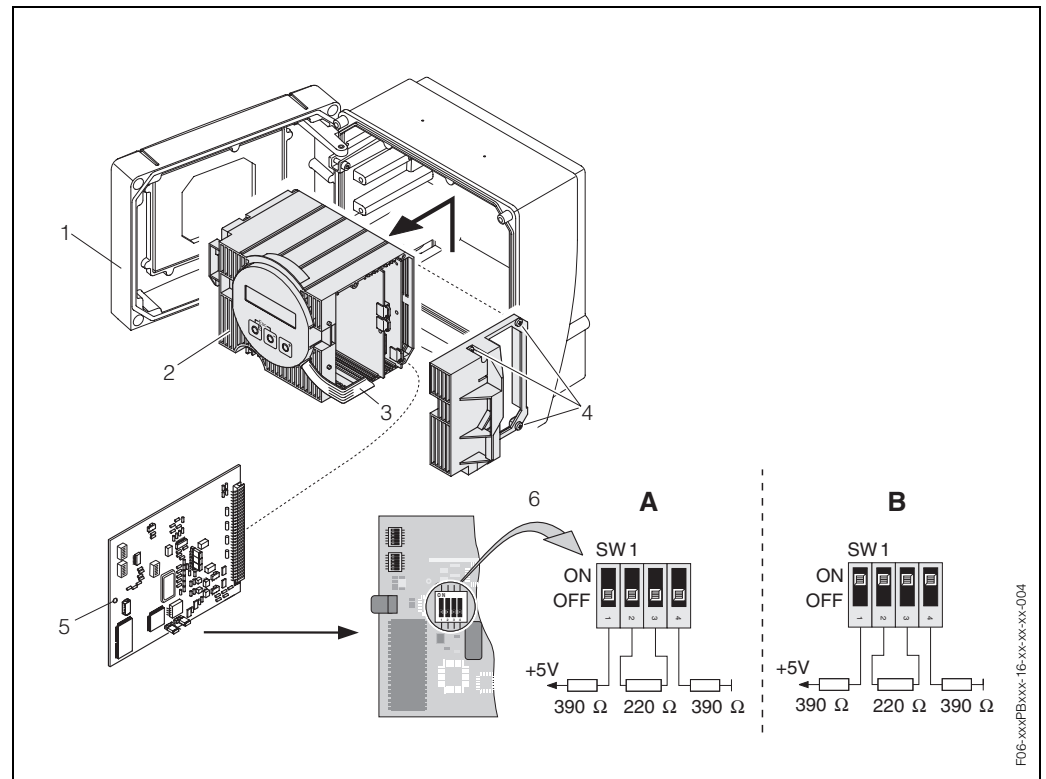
Setting the terminating resistors (PROFIBUS-DP)
